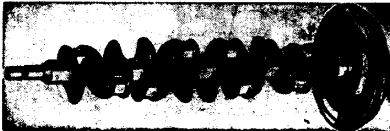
eight throw, five-bearing crankshaft (2-4-2 design).
